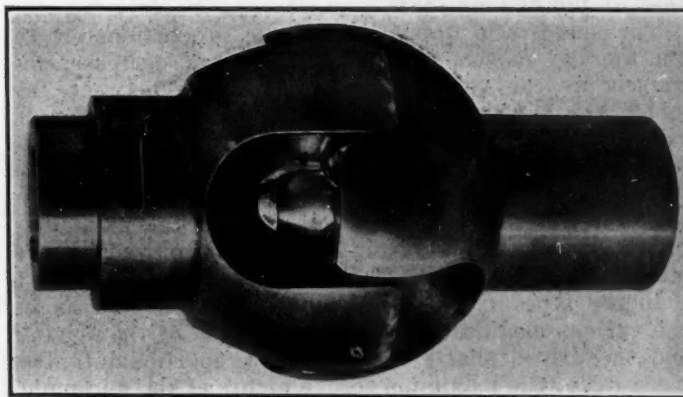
EXTERIOR VIEW OF A STEEL-BALL UNIVERSAL-JOINT
